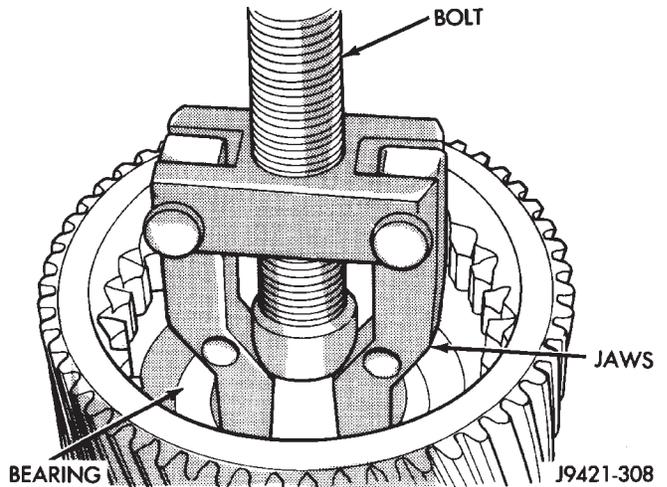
Puller Bolt And Jaws Seated Under Needle Bearing
